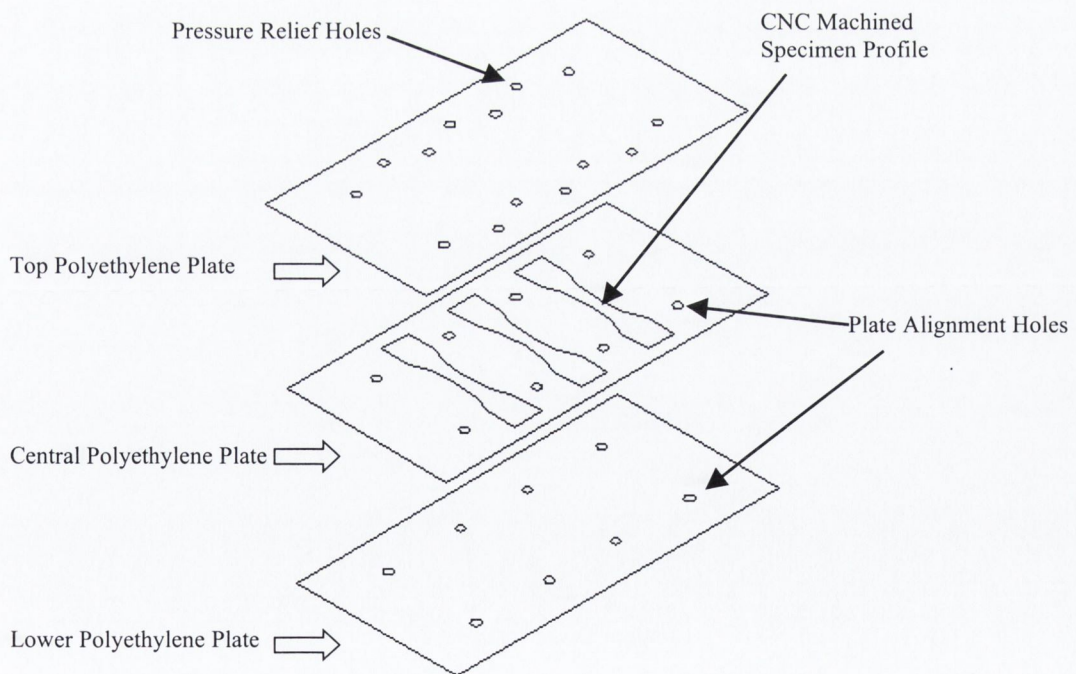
Exploded view of the mould, two aluminium plates 8 mm thickness were added for rigidity (complete engineering drawings of specimens, moulds, and test rigs can be found in Appendix I).
